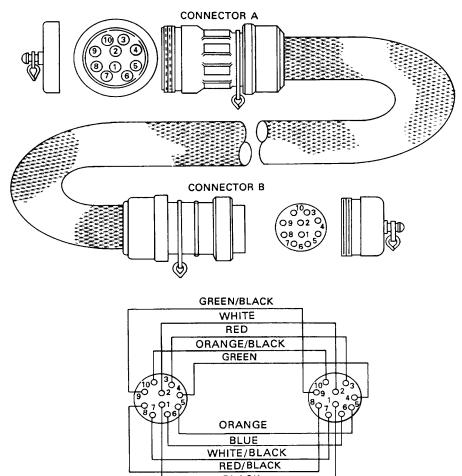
Cable Assembly CX-2771/U, drawing number SM-C-332367.
